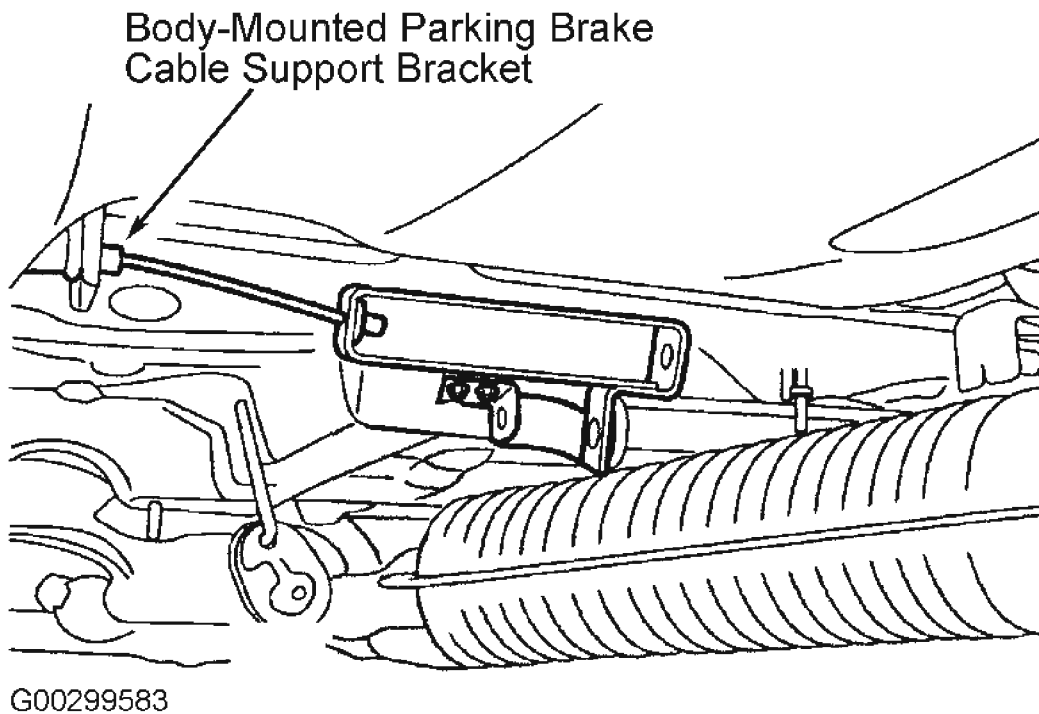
Identifying Rear Parking Brake Cable Bracket
